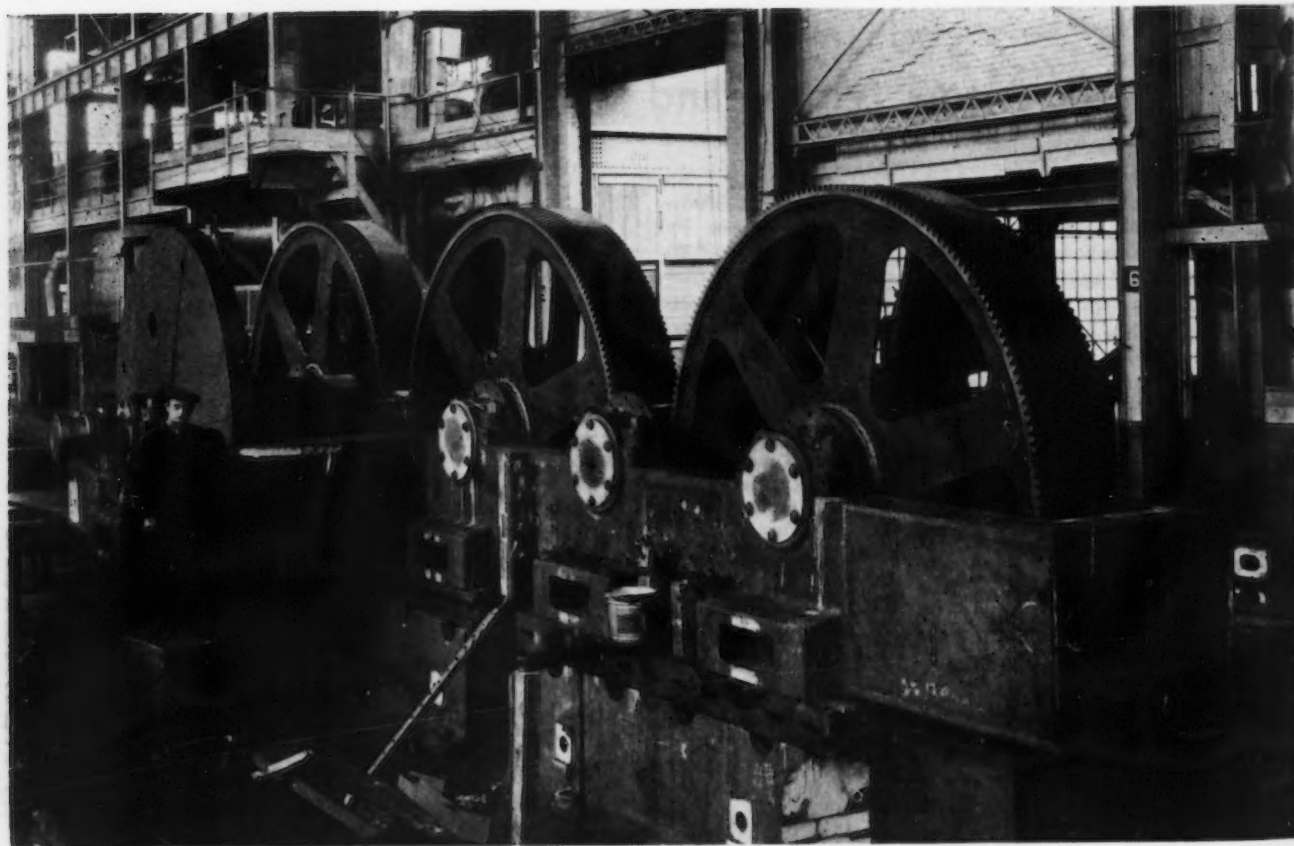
This 1000-hp. mill drive weighs 77 tons and was built from plate and steel castings by arc welding.
